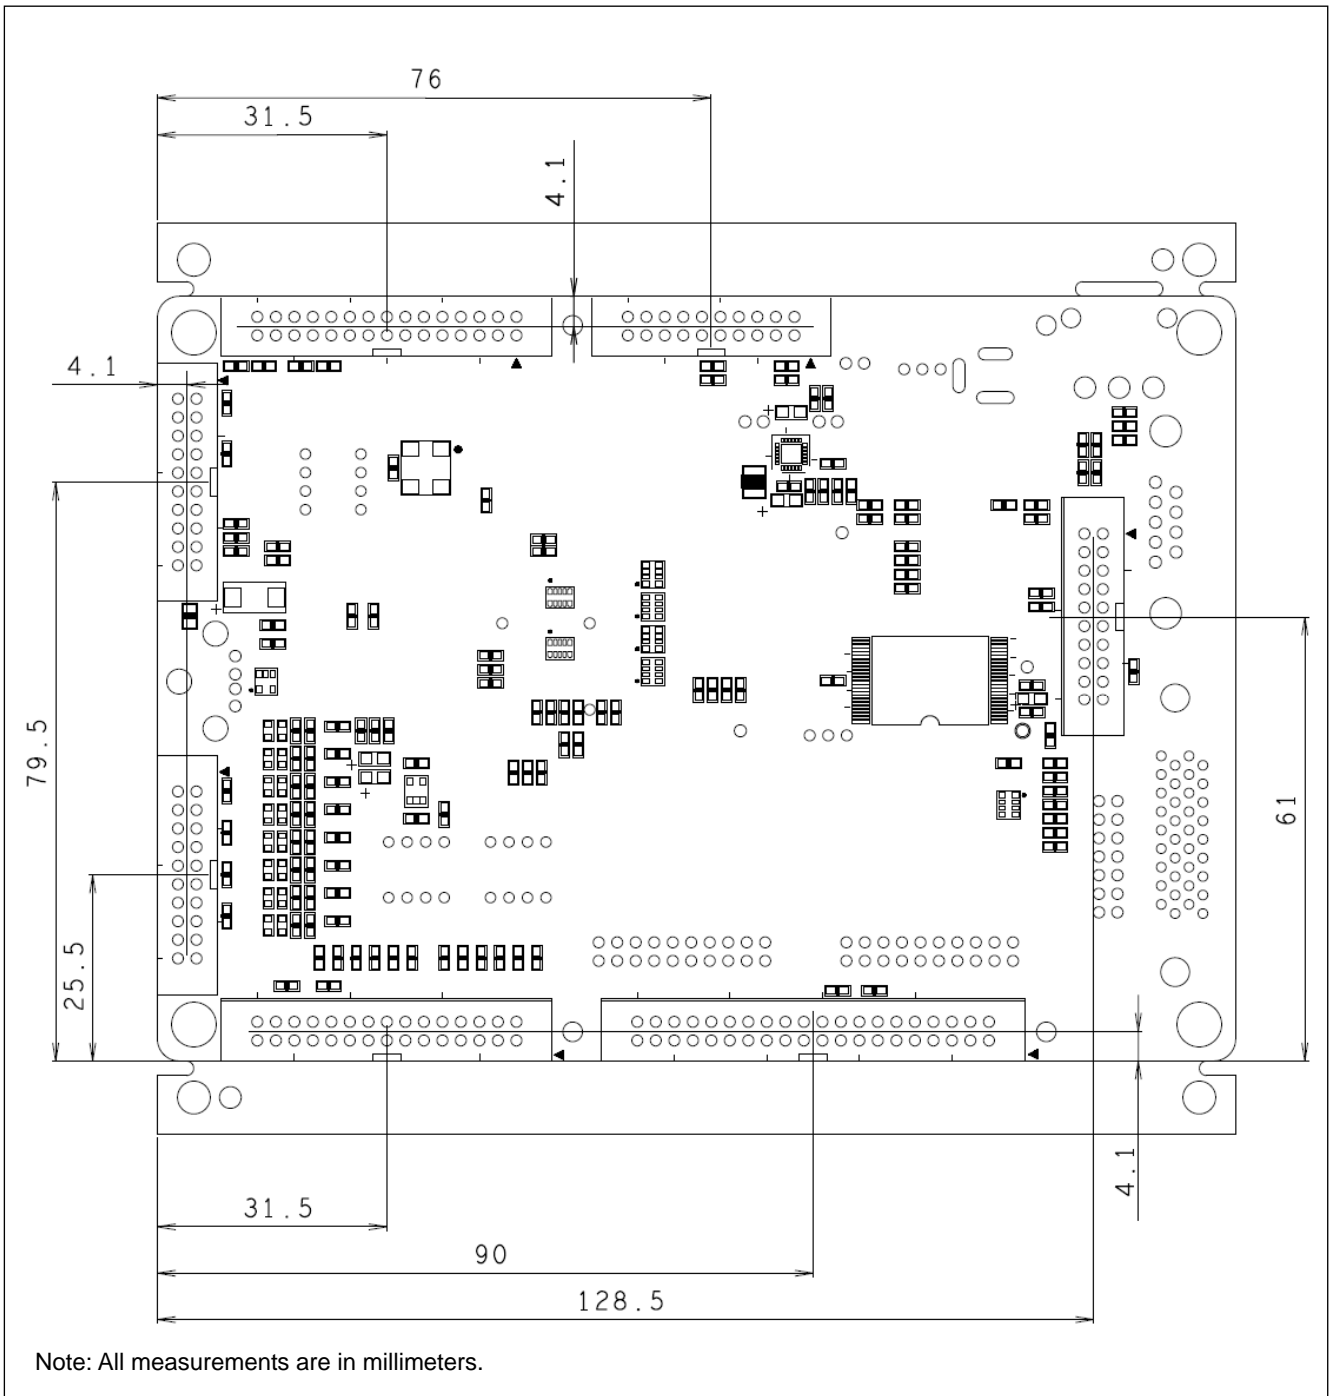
M3A-HS64 Dimensions (Transparent View of the Component Side)
